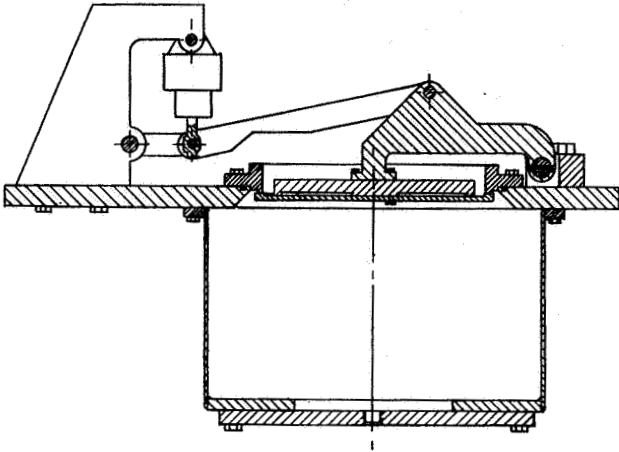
ASSEMBLY OF TEST FIXTURE AND SEAT CONFIGURATION
